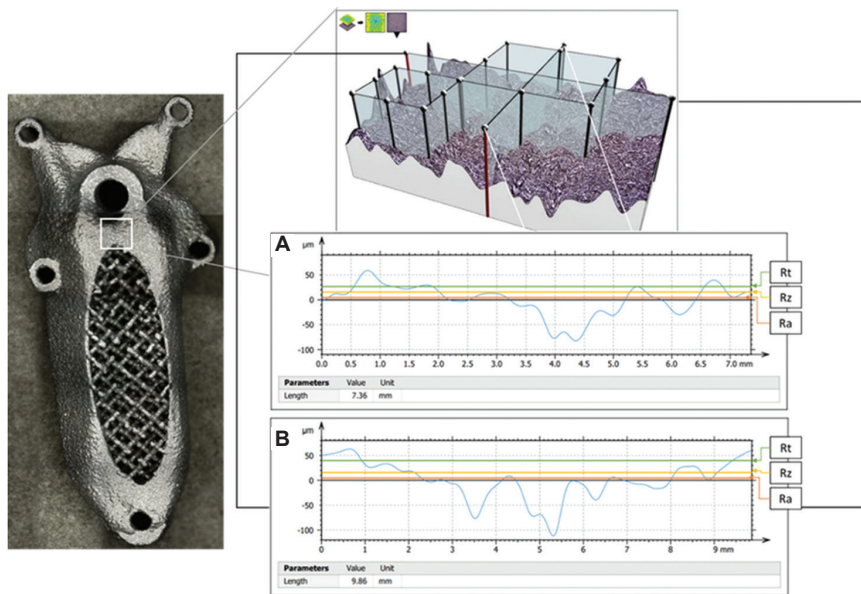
Printed component W-profile: (A) transversal, (B) longitudinal
